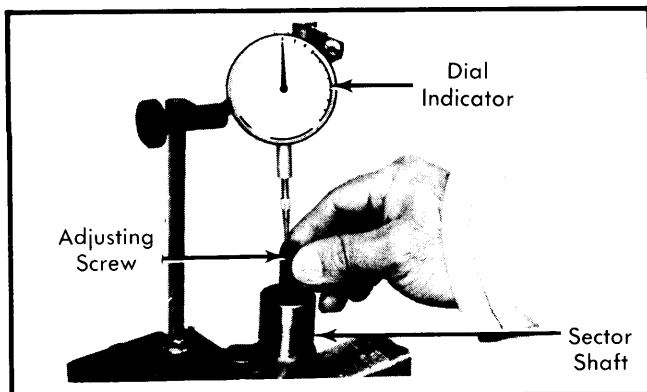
Using Dial Indicator to Check Sector Shaft Thrust Clearance
